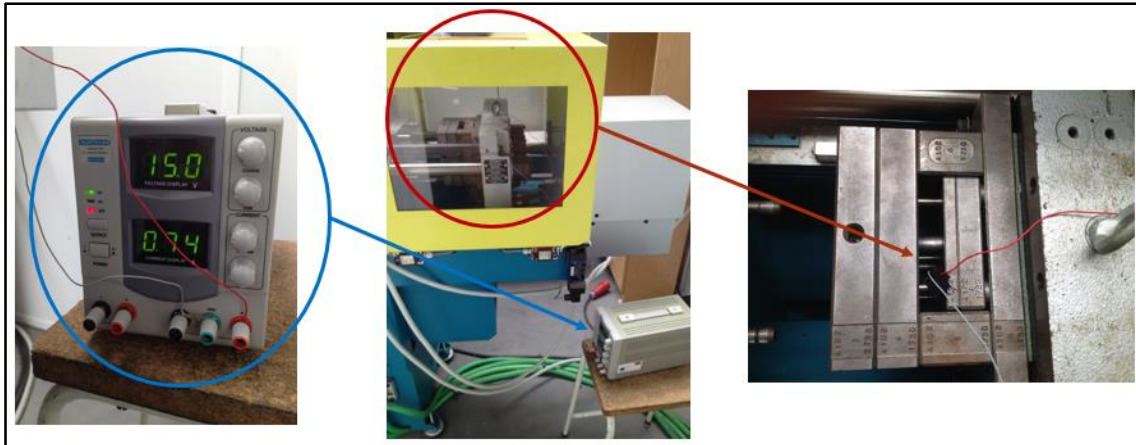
Rapid surface heating temperature system applied on a micro-injection molding machine (part 1).
